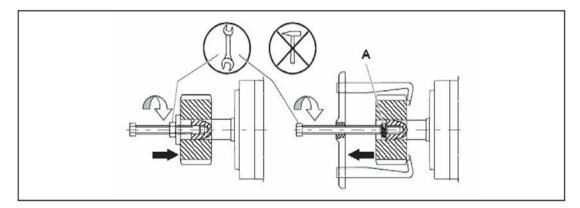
Fitting and removing output elements; A = intermediate washer (for maintaining the centering in the shaft extension)
